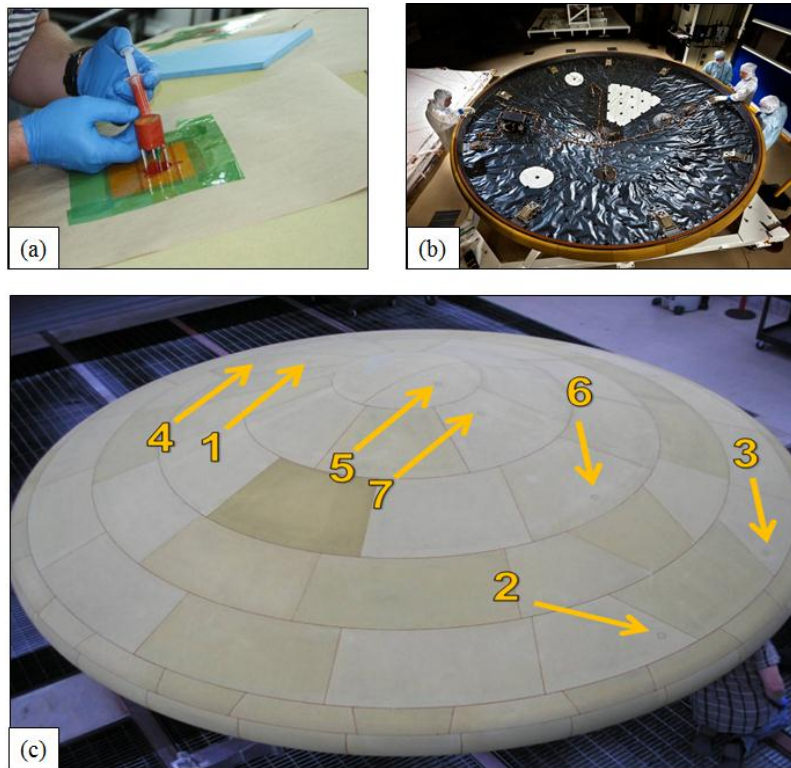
(a) Installation of a MISP plug with RTV-560 bonding agent, (b) MEDLI interface on the inner side of the heatshield, and (c) seven installed MISP plugs on MSL PICA heatshield.
